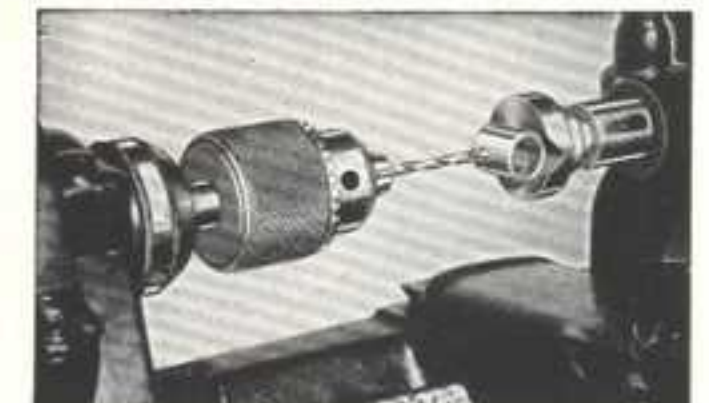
Drilling an Oil Hole in a Bushing with Crotch Center in Tailstock
